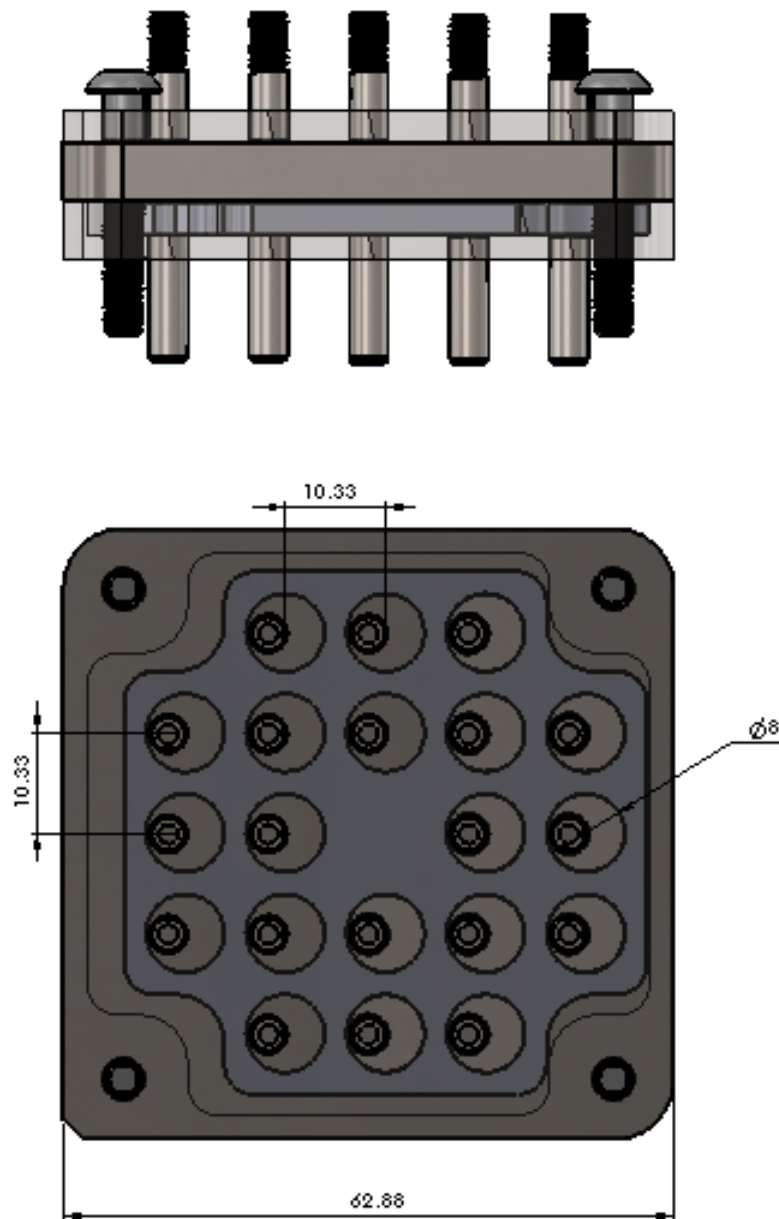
Cross section of the rotating mechanism with dimensions (in mm).
